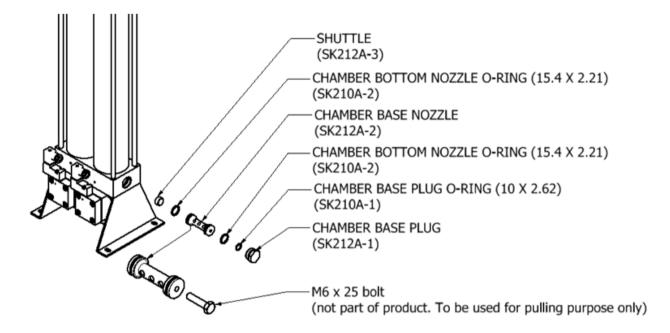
Exploded view of bottom shuttle of Dryspell Plus 10
